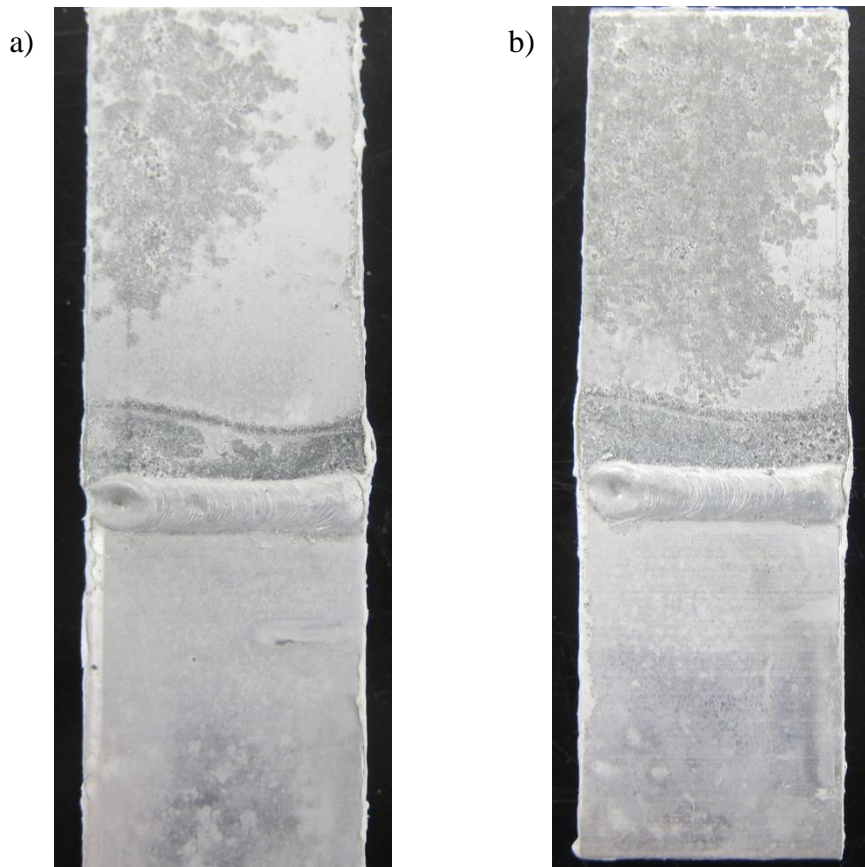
Duplicate samples of lap-joint welded configuration A1 (ER5356/AA7003/L) in the as-welded T6 condition.
